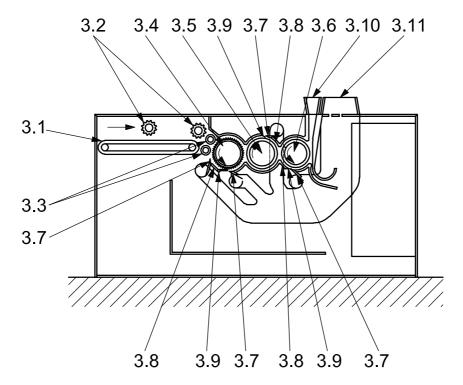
Machine components — Cleaner iTeh STANDARD PREVIEW (standards.iteh.ai)
